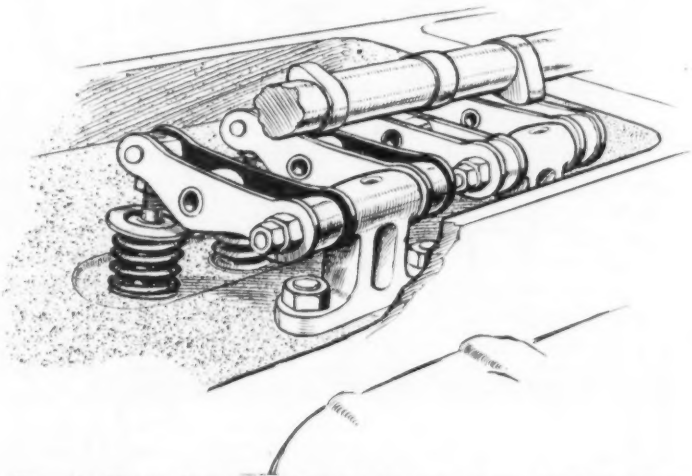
VALVE OPERATING DETAILS OF THE 18-HP. FOUR-CYLINDER PHOENIX ENGINE
